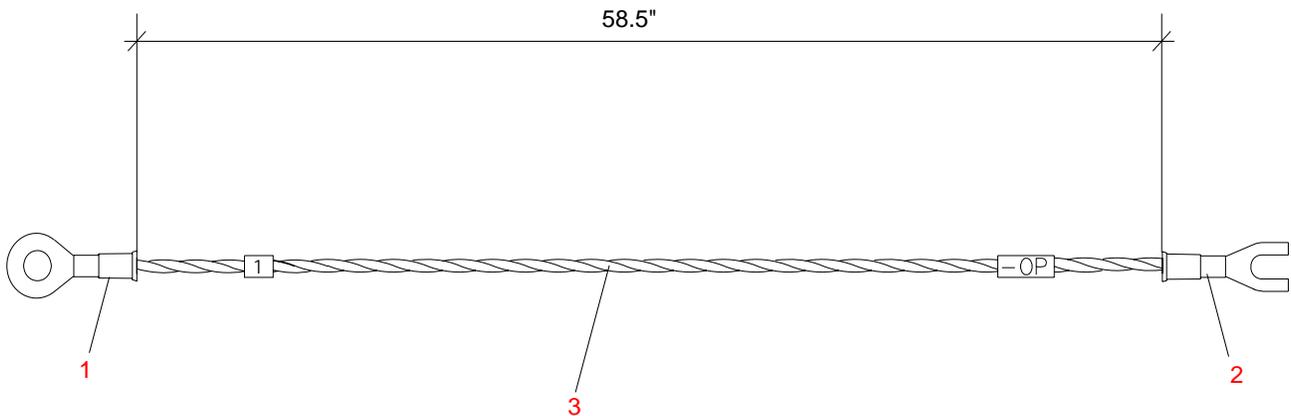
Negative Wire - Driver Board 1 Cable Assembly
